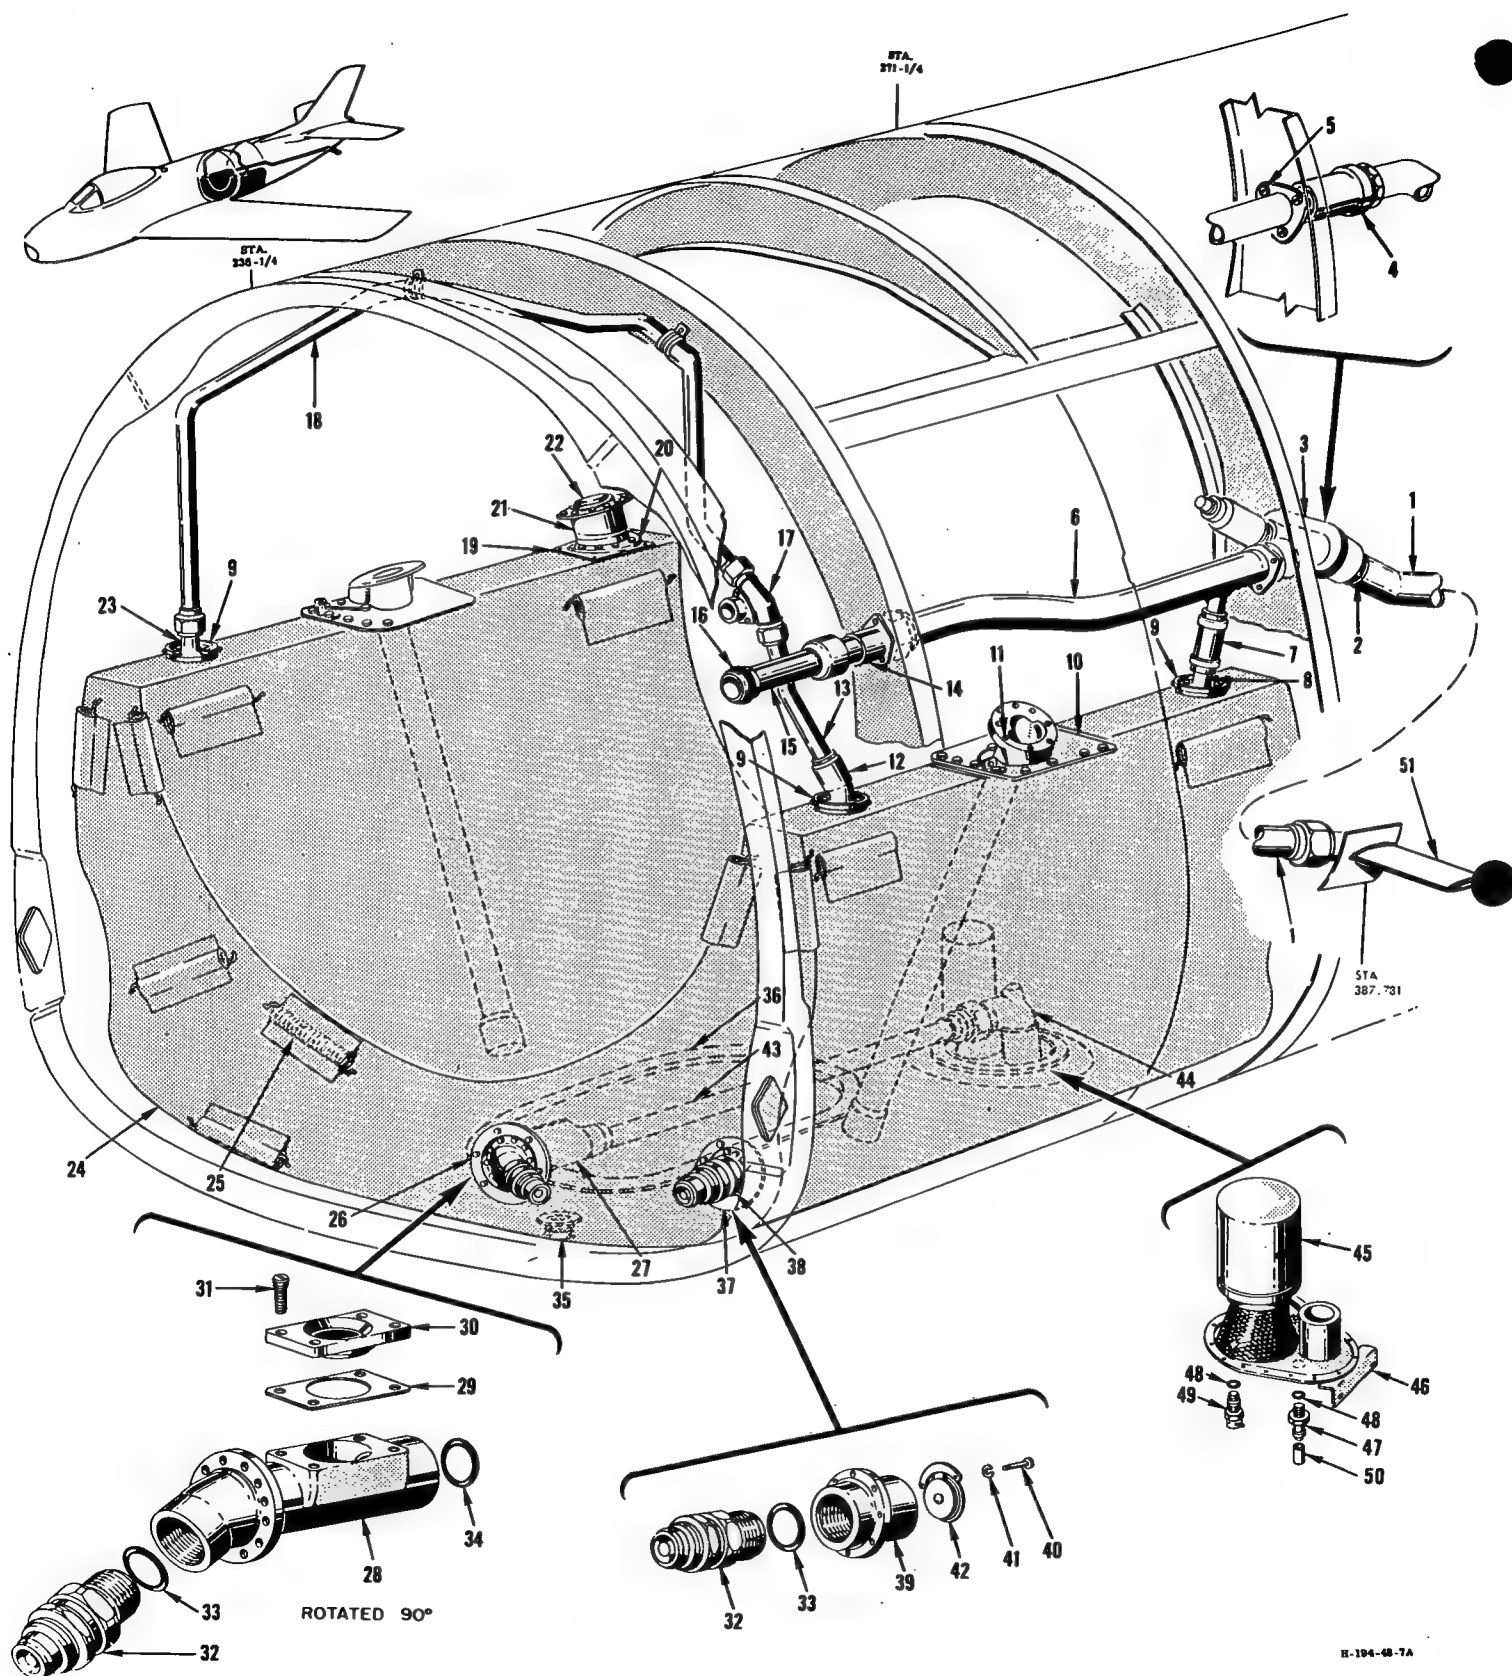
COMPLETE AFT FUSELAGE FUEL SYSTEM EQUIPMENT INSTALLATION
